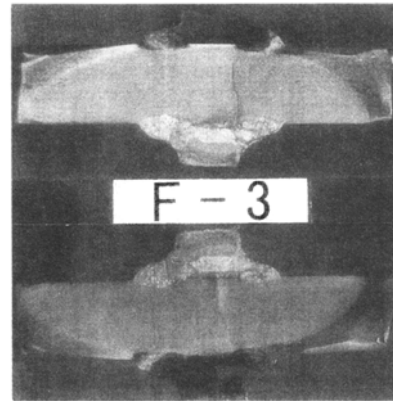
Fracture surface after fatigue test (Type F, 150 N/mm<sup>2</sup>, 2.09 × 10<sup>6</sup> cycles)
